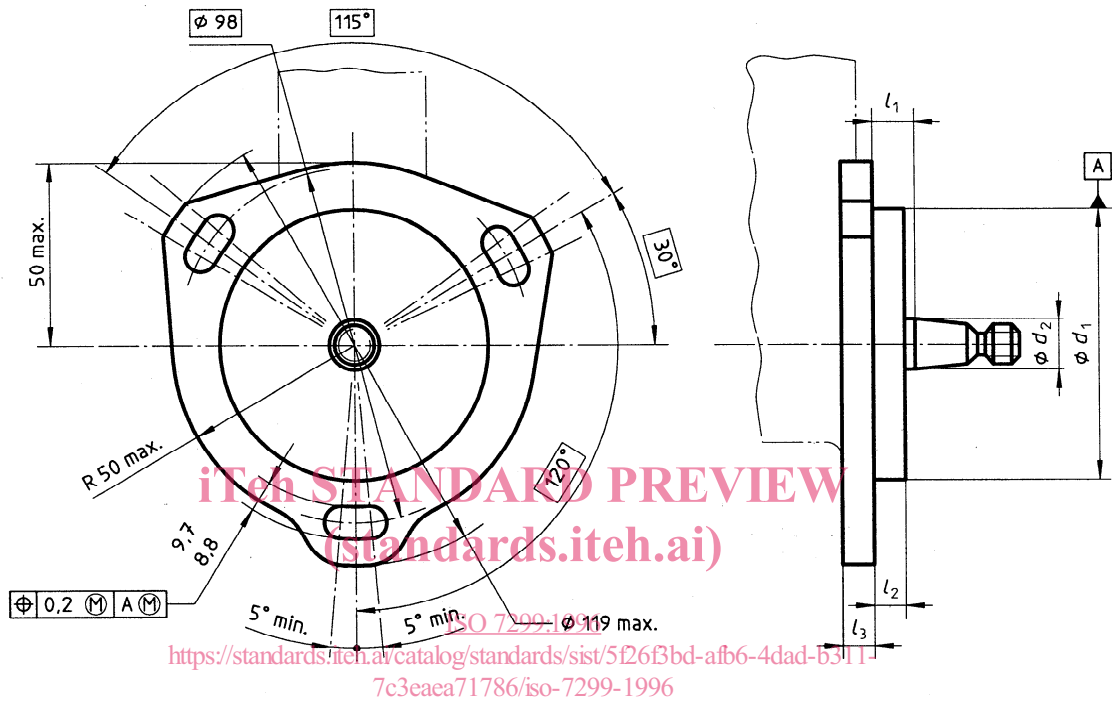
In-line fuel injection pumps — Type 5 end-mounting flange
